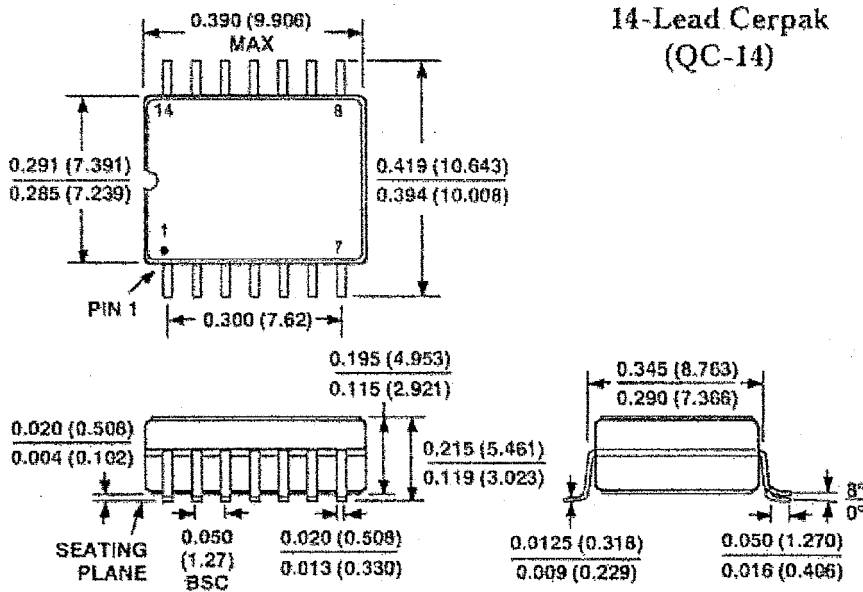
Geometric dimensions of a 2 direction accelerometer chip. Dimensions shown in inches and (mm).
